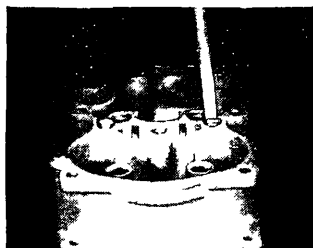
Install pump discharge jets and plugs. Make certain jets are clear of all restrictions and seat properly. No washers are used beneath plugs
